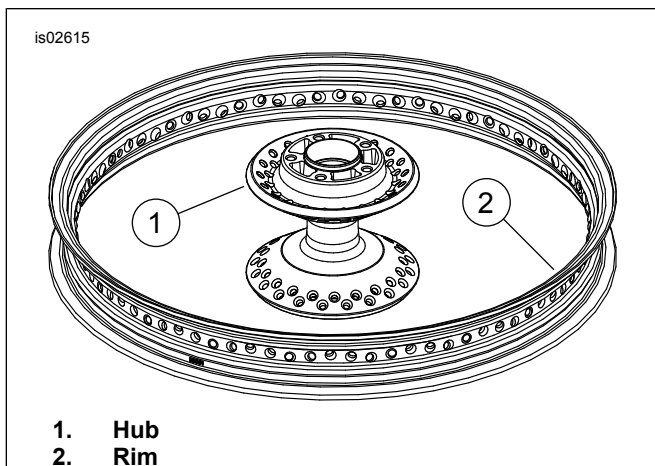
Spoke Wheel Components (21-inch wheel shown)
